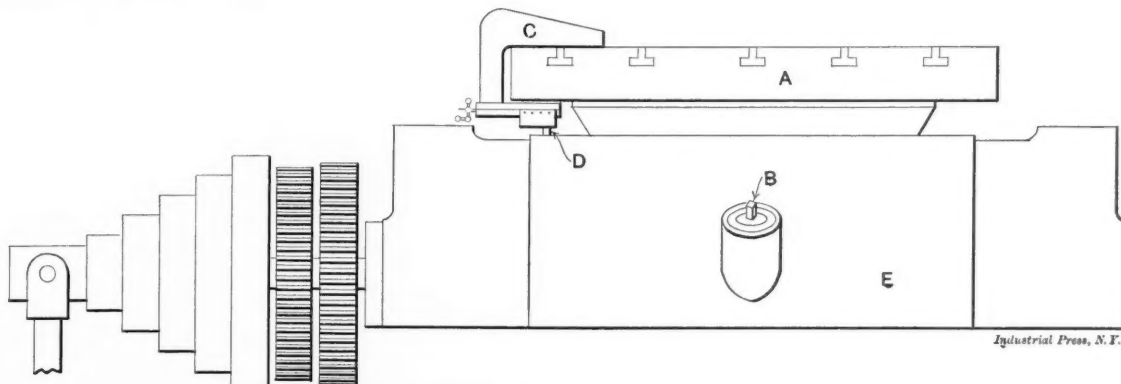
Method of Facing the Outer Bearing Rings of large Boring Mills.
